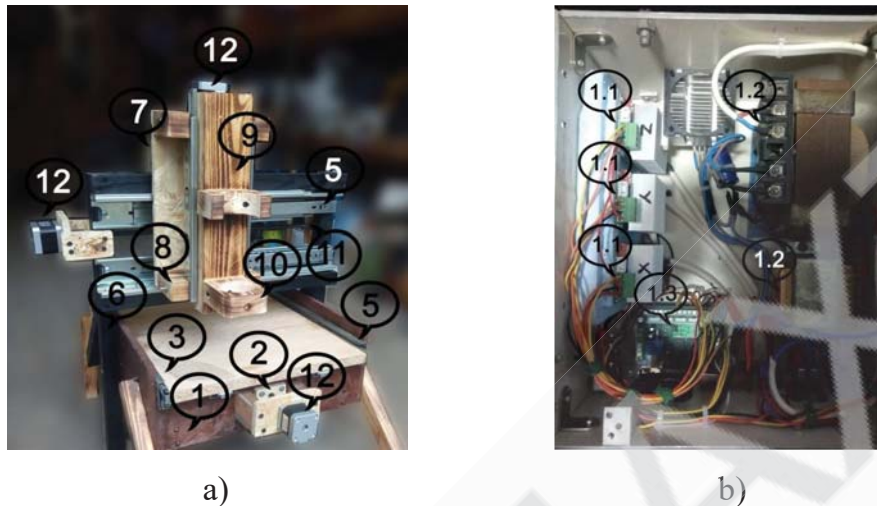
a) External view of the developed CNC machine tool b) External view of the machine control unit
